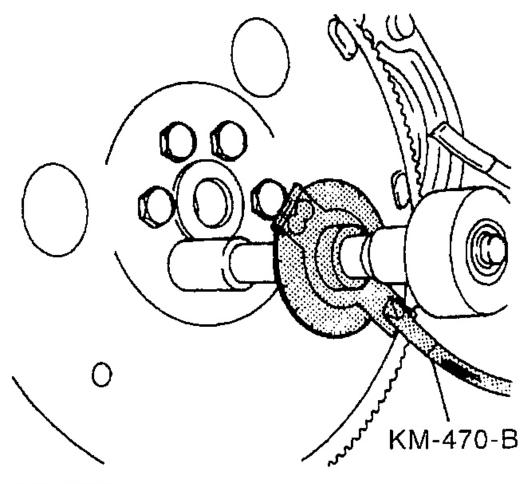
Installing New Crankshaft Rear Oil Seal Courtesy of SUZUKI OF AMERICA CORP.
